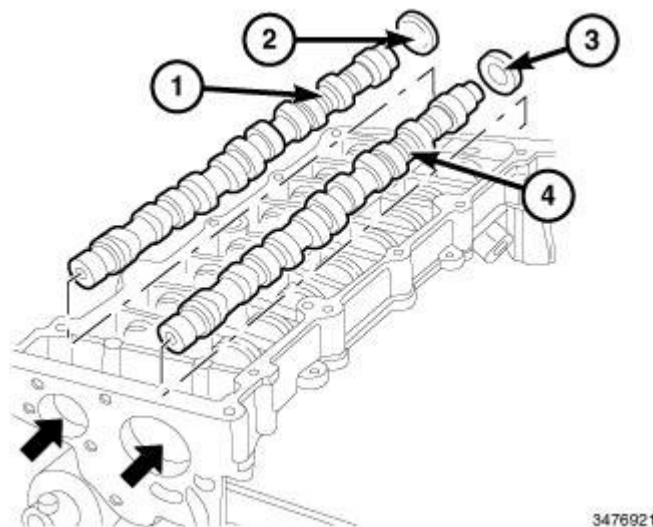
Intake Camshaft, Plug, Exhaust Camshaft & Oil Seal
